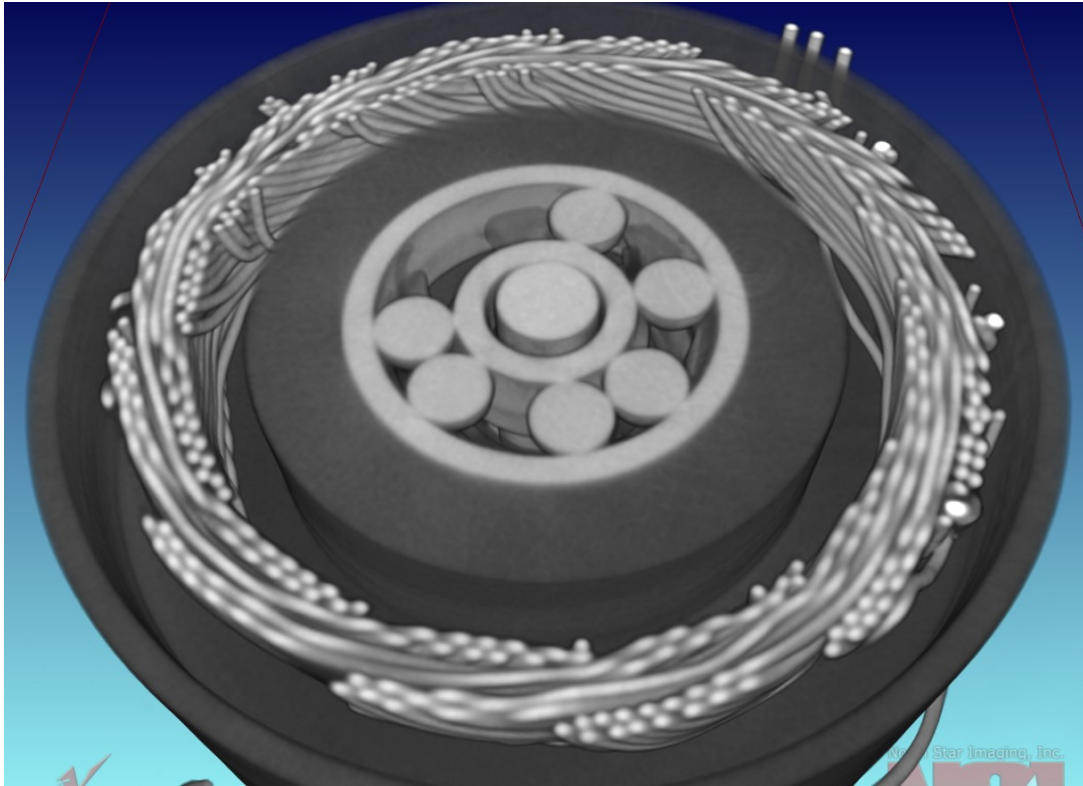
View of the Rear Motor Bearing Showing the Balls Have Displaced Around the Circumference of the Bearing Races to a Jamming Position. This Makes the Bearing Unable to Rotate at All.
